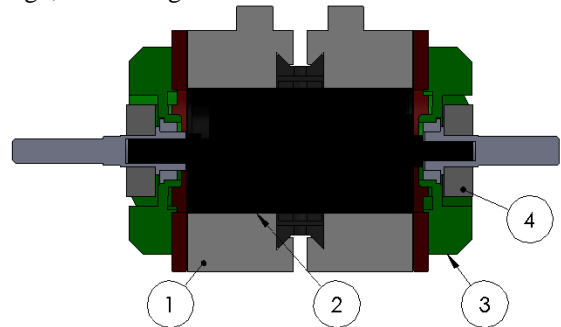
Cross section of hybrid actuator design, with concentric brake (1), motor (2), block (3) and stopper (4).
